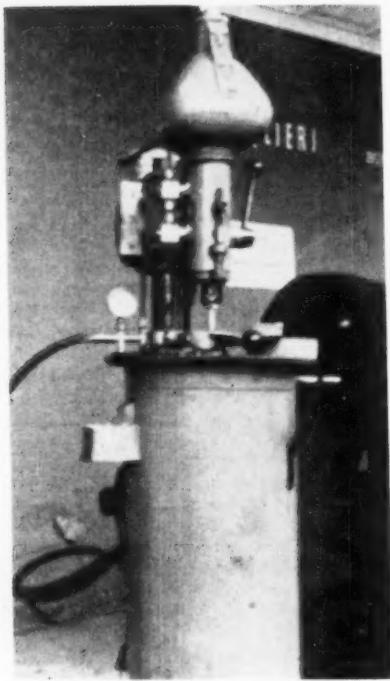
Italian TOR machine for drilling glass and other materials from both sides.
